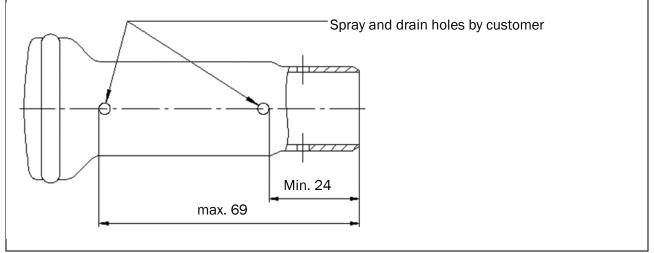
Static Spray Head, Limit Dimensions for Holes
